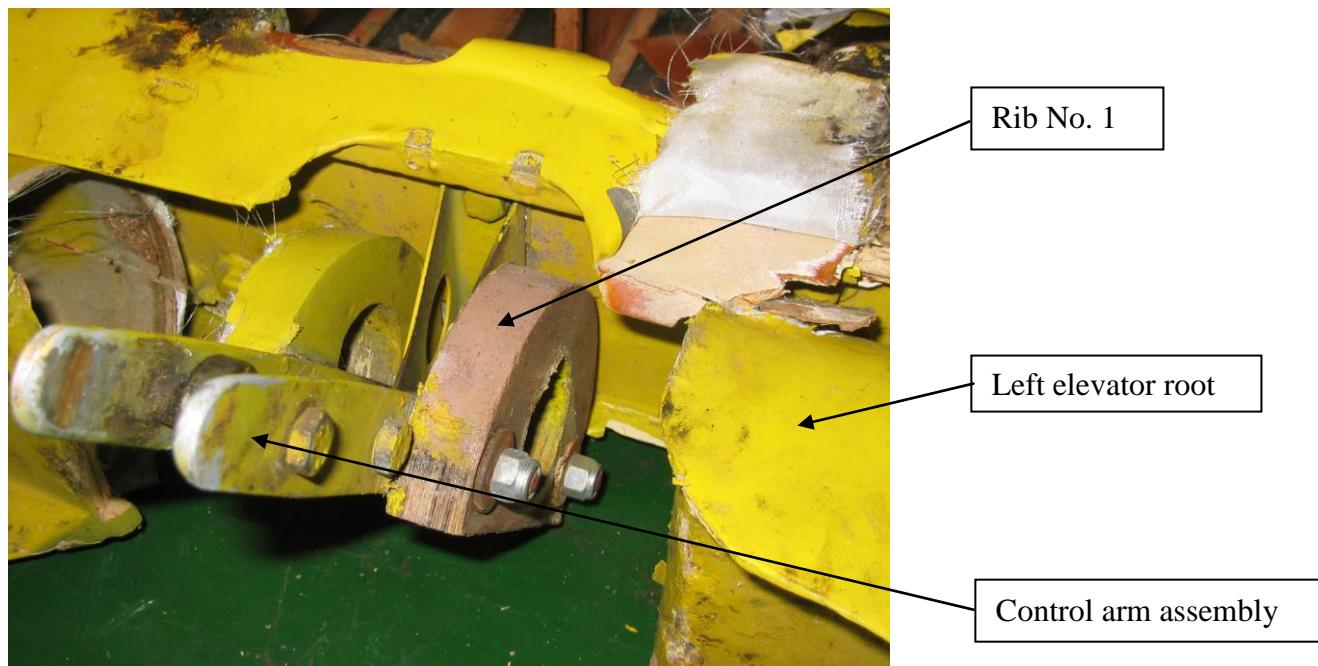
Left elevator Rib No 1 showing lack of wood fibre adhesion to the glue (pink surface). Note the failure of the wood skin in preference to the glue on the right elevator.
